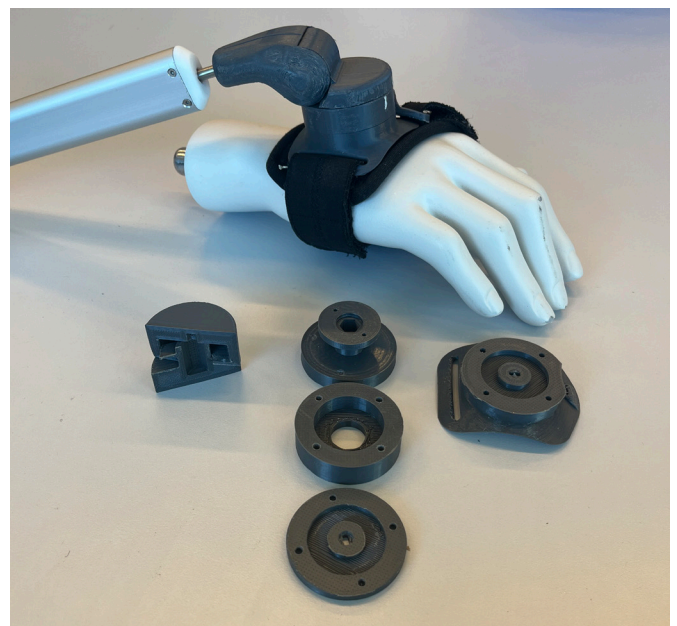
Fully assembled concept 2 prototype (top), several partial prototypes (bottom)
